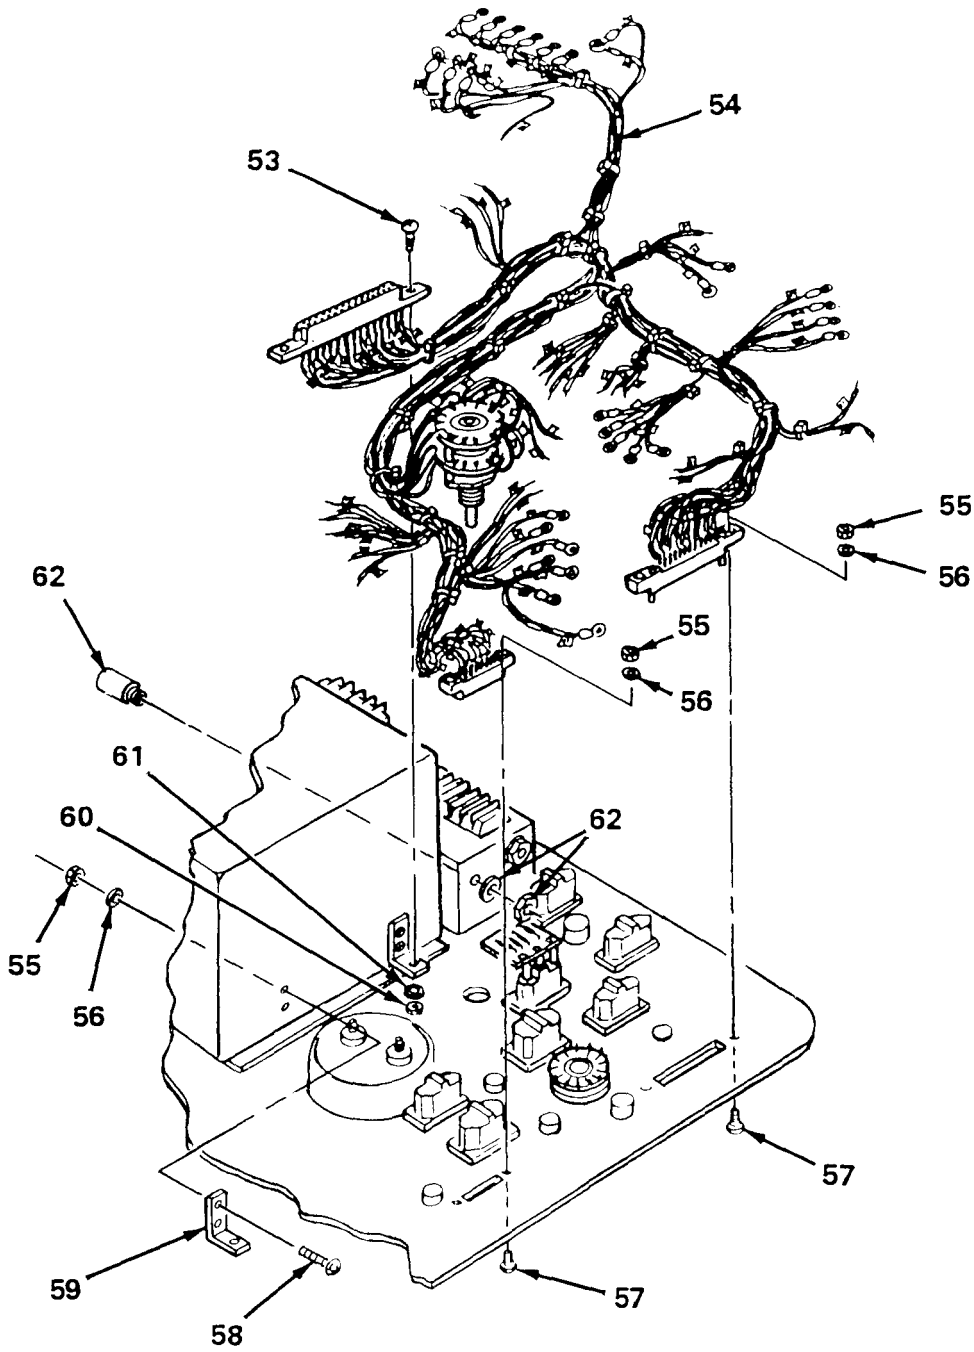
, Group 02. Test Set Panel Assembly (Sheet 5 of 7)
